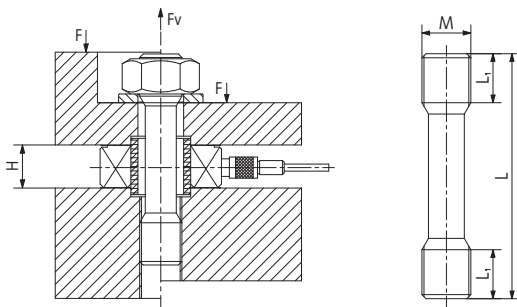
Mounting with pretensioning screw Type 9420A... (see data sheet 9420A\_000-192)
